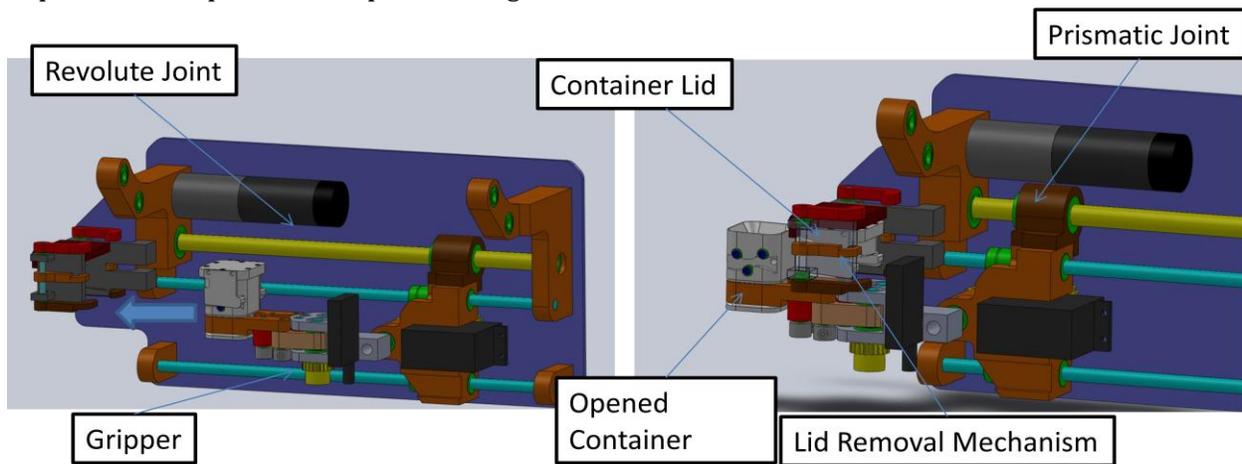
To remove the lid, the gripper slides horizontally through the lid removal mechanism.
